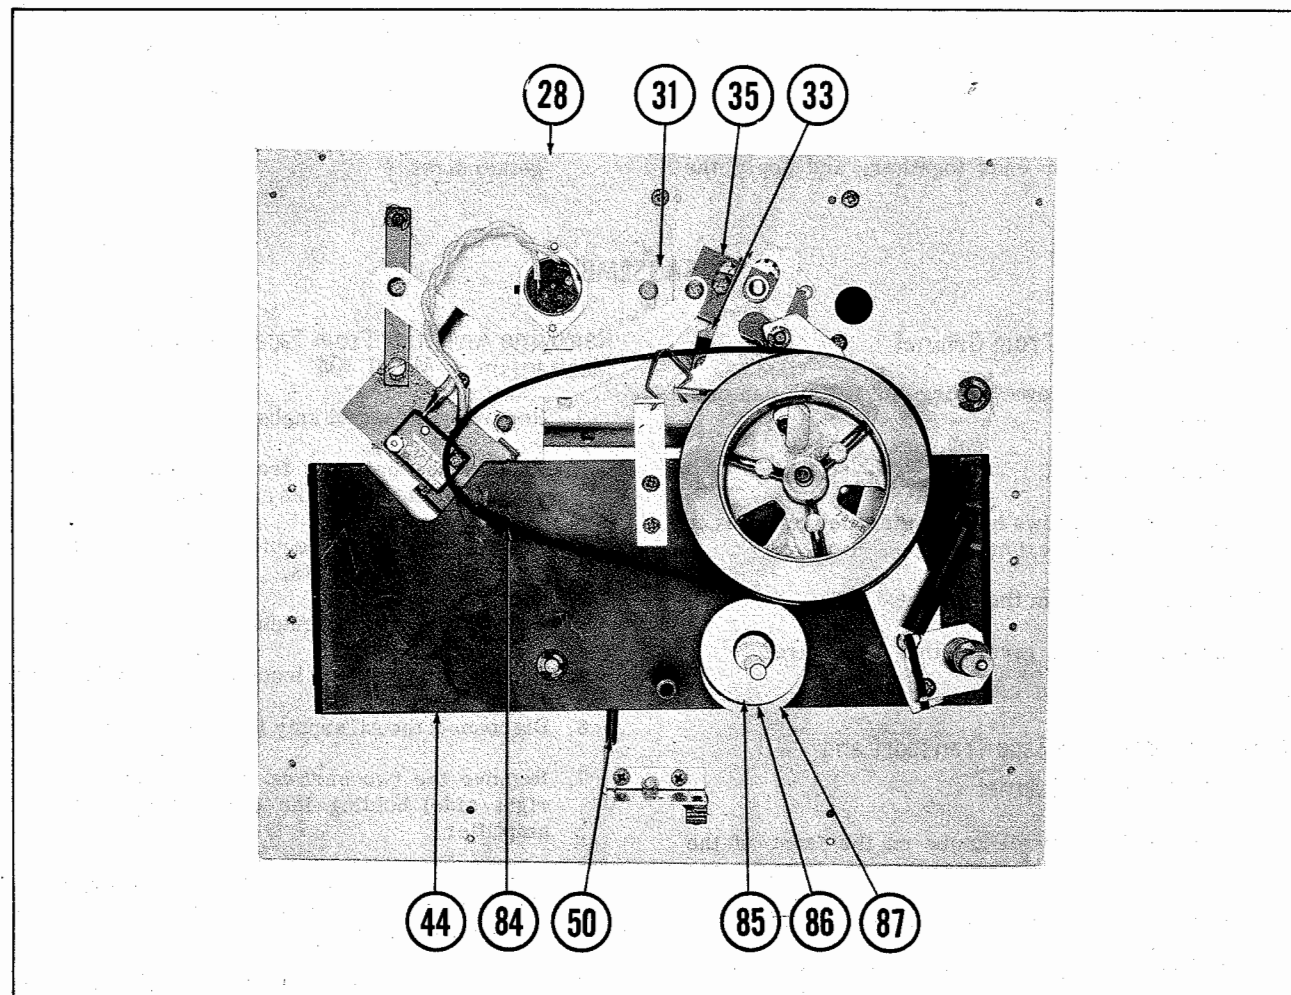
BOTTOM VIEW OF MECHANISM WITH BOTTOM OF SUB DECK REMOVED
